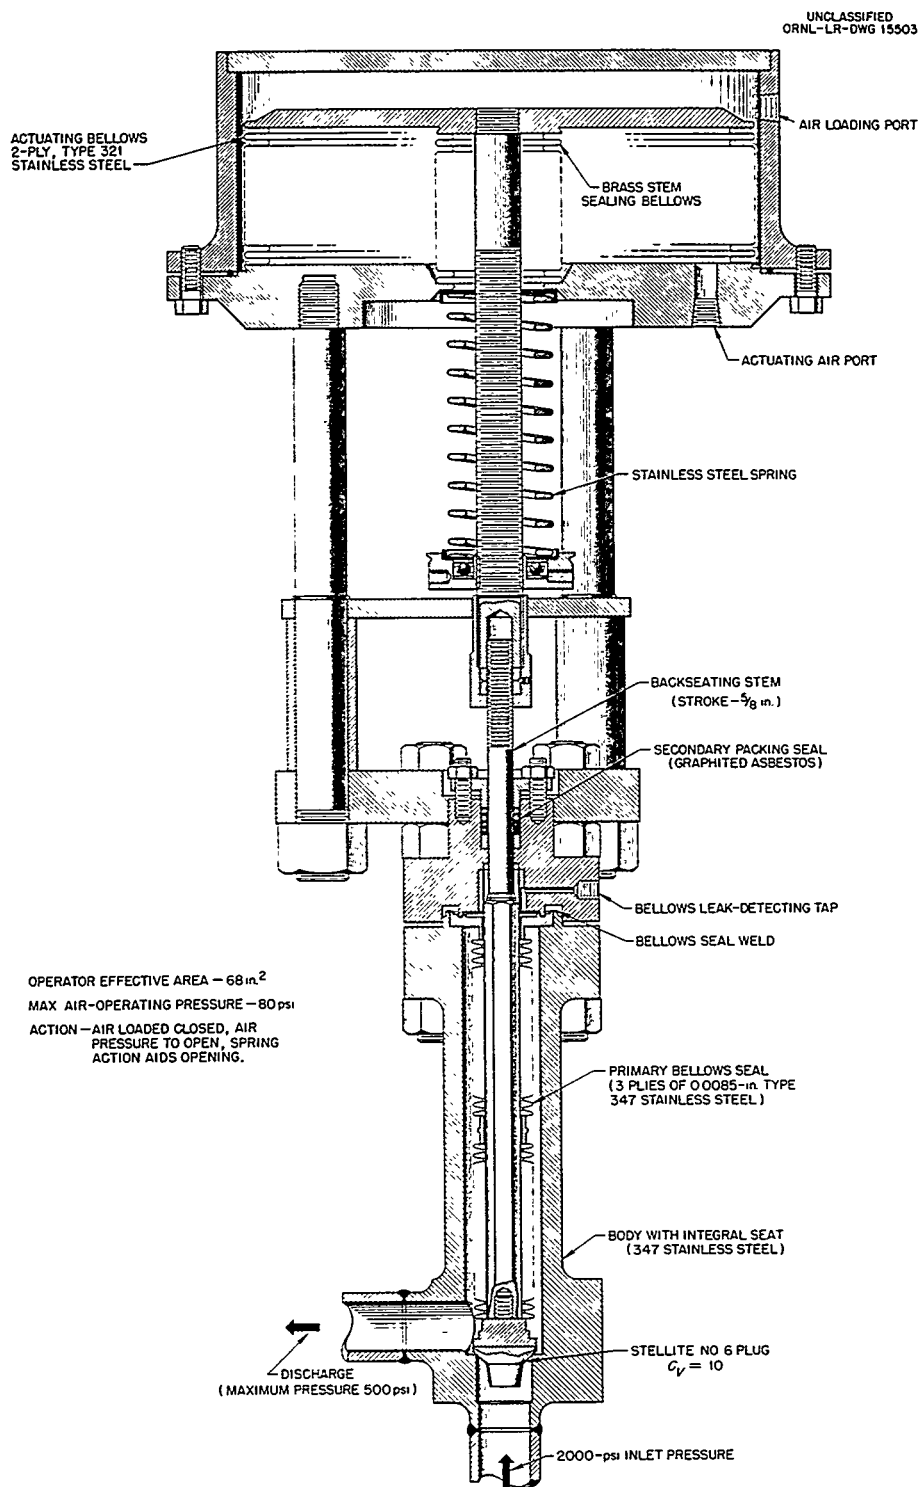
Blanket Dump-Valve and Actuator Assembly.
